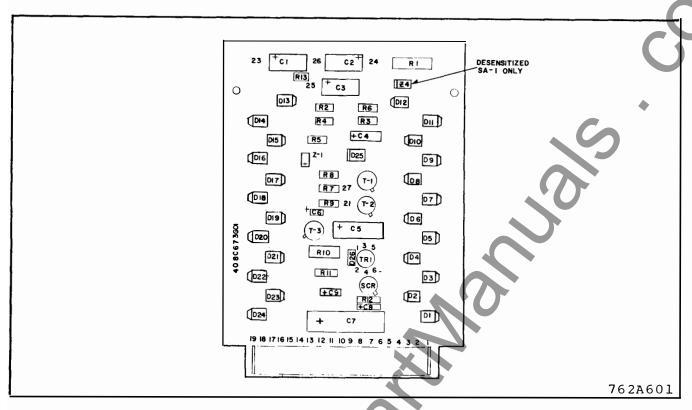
Component Location on Printed Circuit Board for Type SA-1 Relay 48/125 VDC
